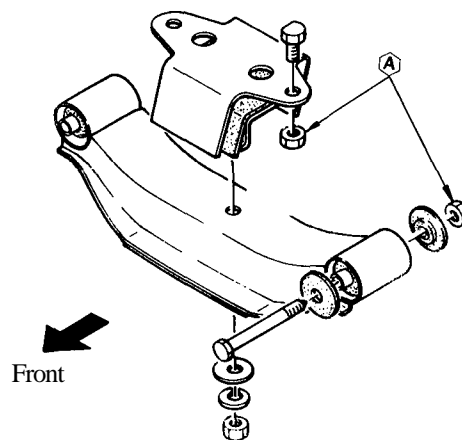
Sectional view of front engine mounting, and front insulator
